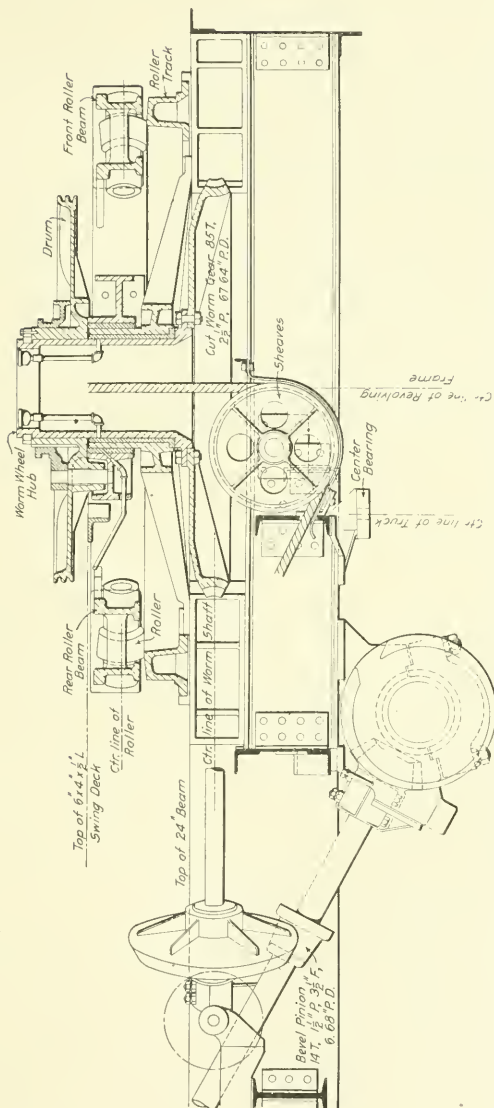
PLAN AND SECTIONAL ELEVATION OF SWINGING AND PROPELLING MECHANISM OF THE LOCOMOTIVE PILE DRIVER
